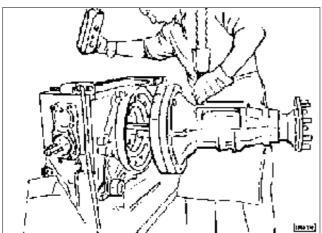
Important: to facilitate assembly of the trumpet housing, it is good policy to fit centralizer dowels p/n 5.9030.537.0 to the transmission housing. Apply sealant (Pianermetic 510) to the surface of the trumpet housing.
